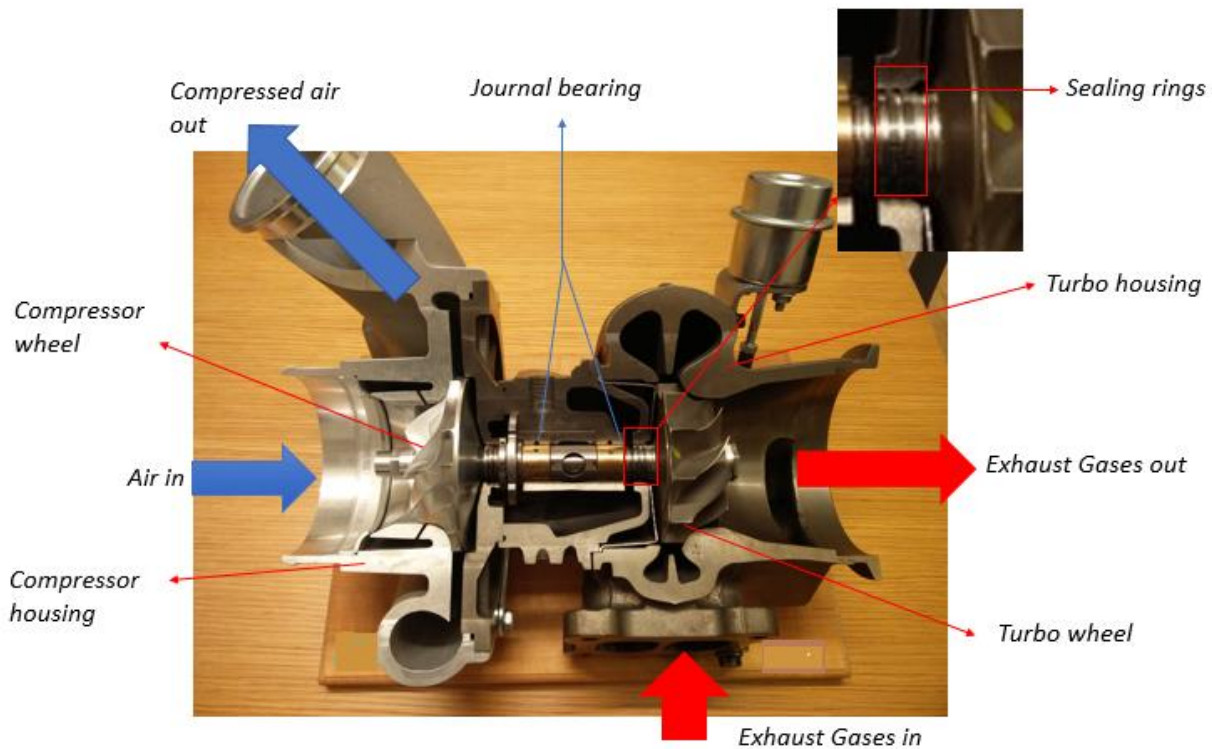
Cross-section view of turbocharger with components description, how the exhaust gases rotate the turbo wheel and how the air is then compressed through a compressor wheel.
